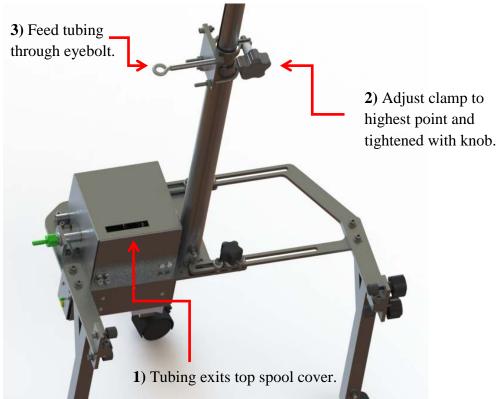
The oxygen tubing exits the top spool cover and is fed through the eyebolt located on the adjustable pole clamp
